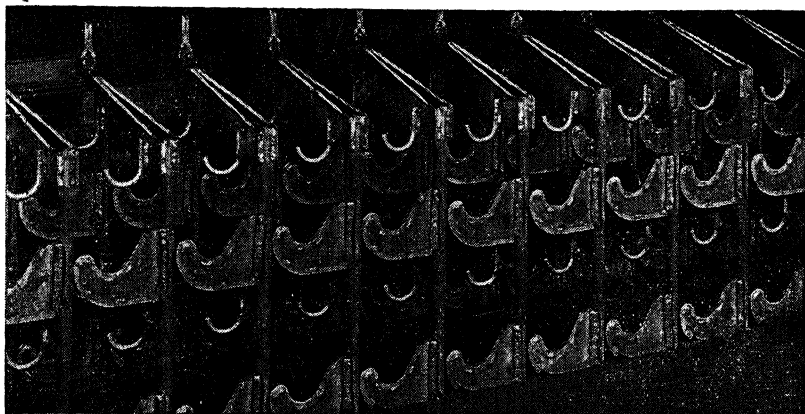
Racks used to carry finished machined crankshafts and other motor parts. Brass bars are welded to steel to provide a rigid economical construction not injurious to machined parts which they hold.
